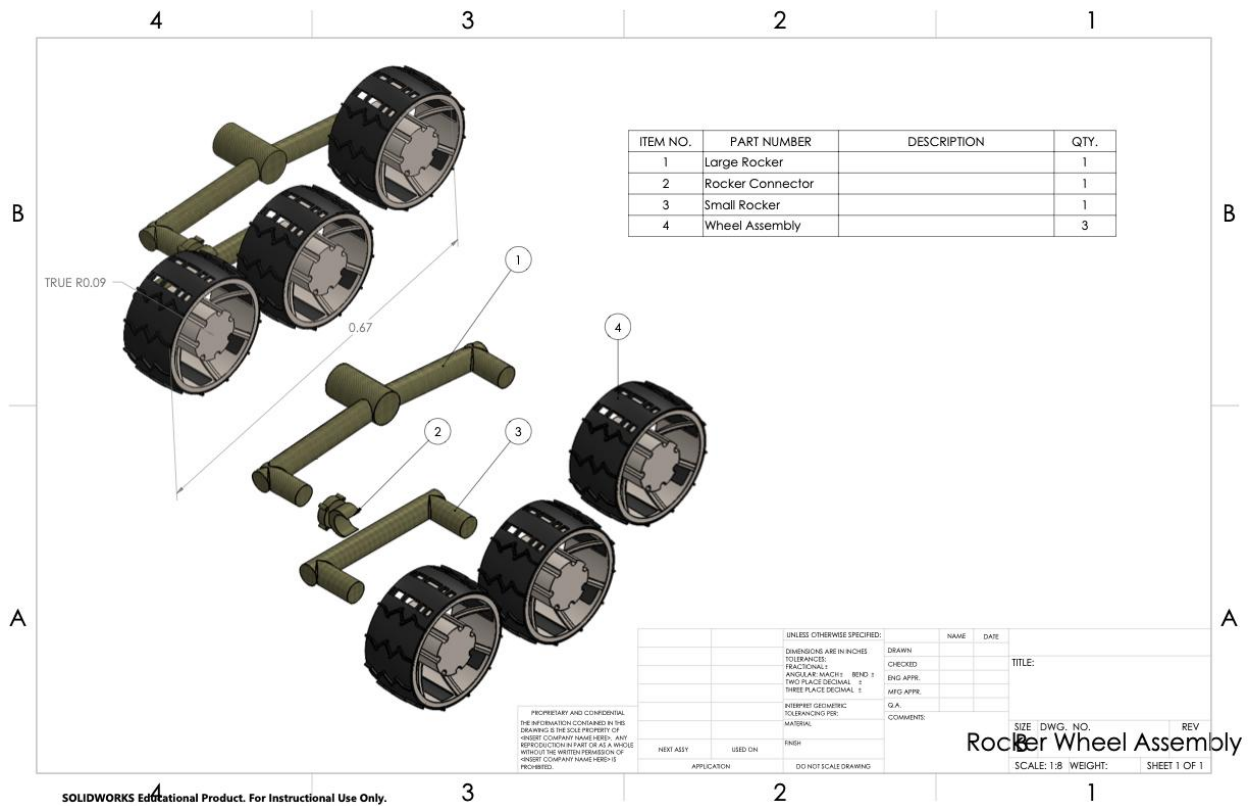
Solidworks CAD 3D model of ARES-42 rocker & wheel assembly
